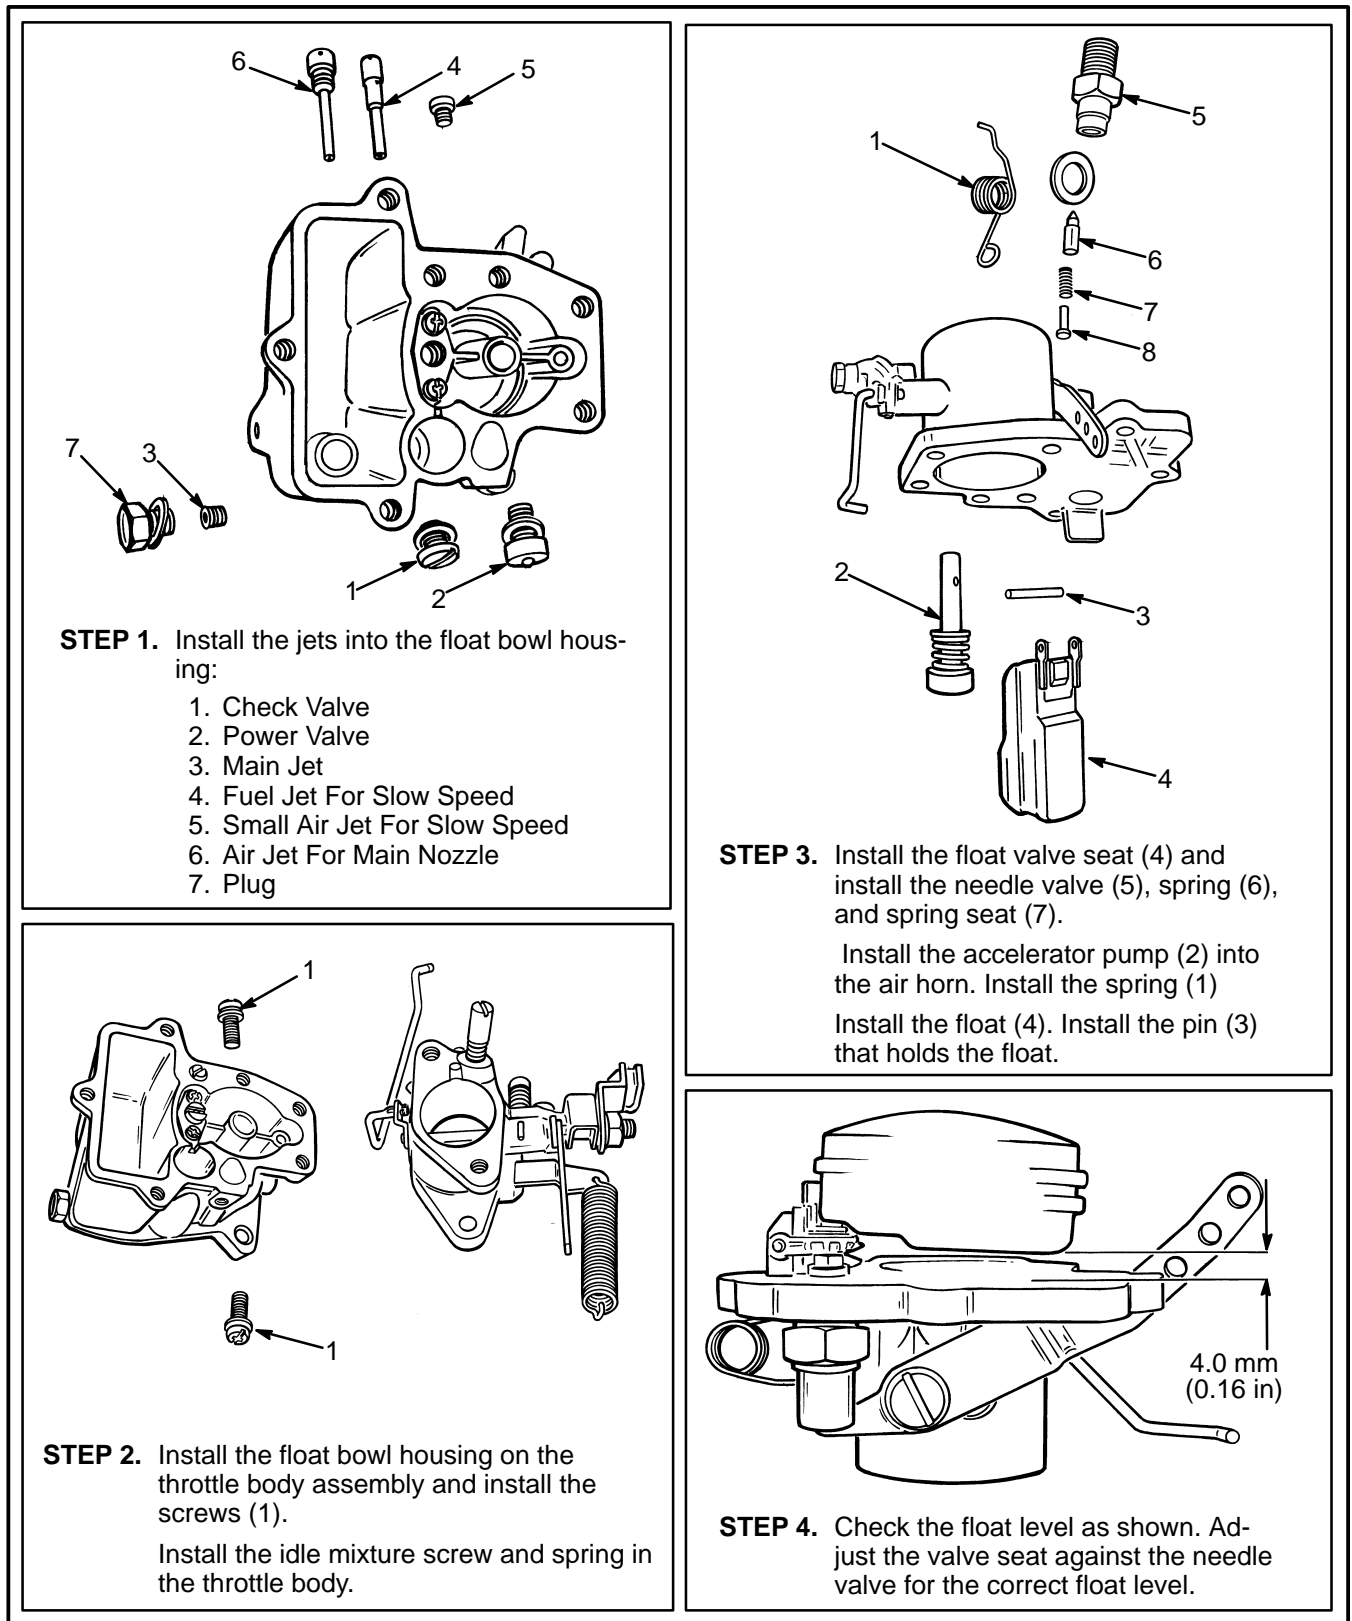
ASSEMBLY OF THE CARBURETOR (1 of 2)
